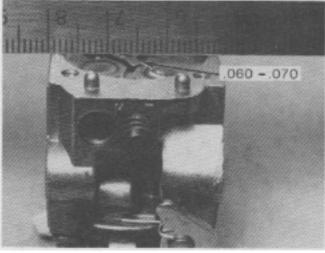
To check the height of the inlet lever of the WALBRO WT-II carburetor, place a straight edge across carburetor boom above the lever. The top of the lever should be between .060-.070.
